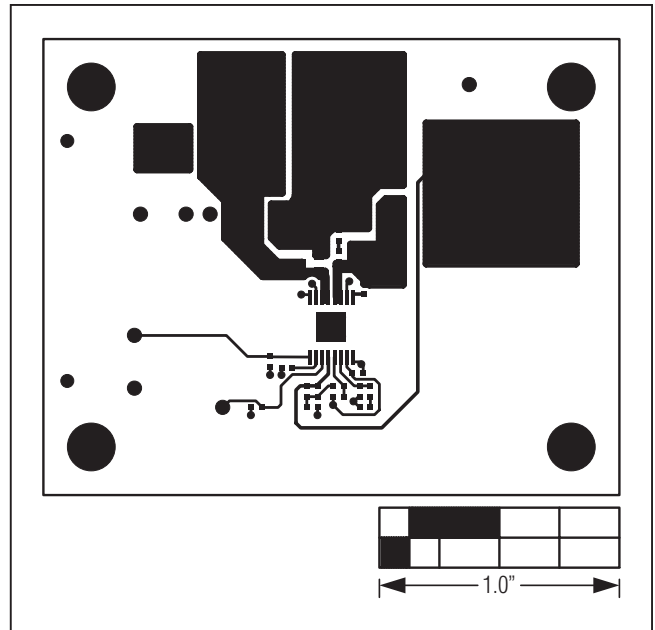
MAX16907 EV Kit PCB Layout—Component Side
